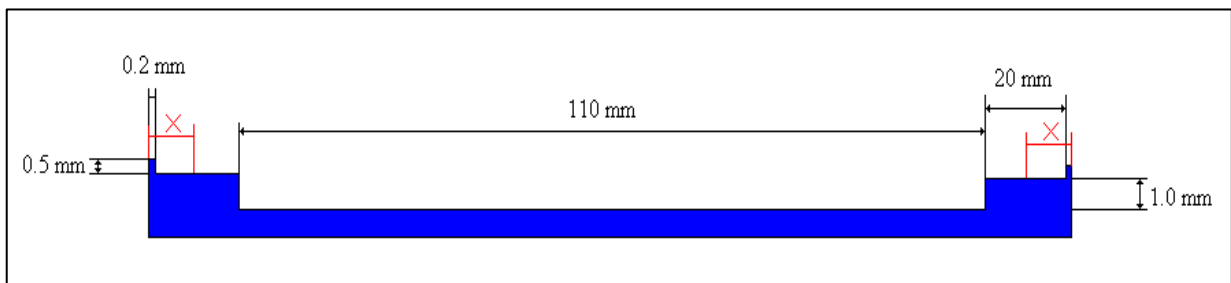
A cross section and dimensions of the silicone mould used to fabricate the self-sensing samples.
